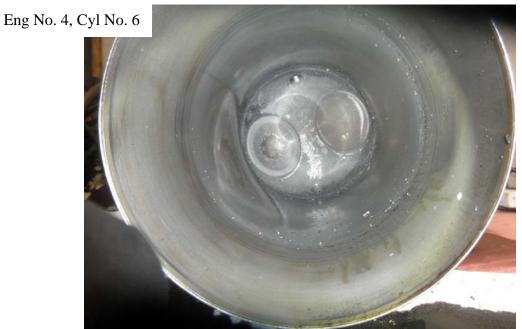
View of the inside of the No. 6 cylinder showing no damage to the barrel and the two valves were centered in place in the closed position.
